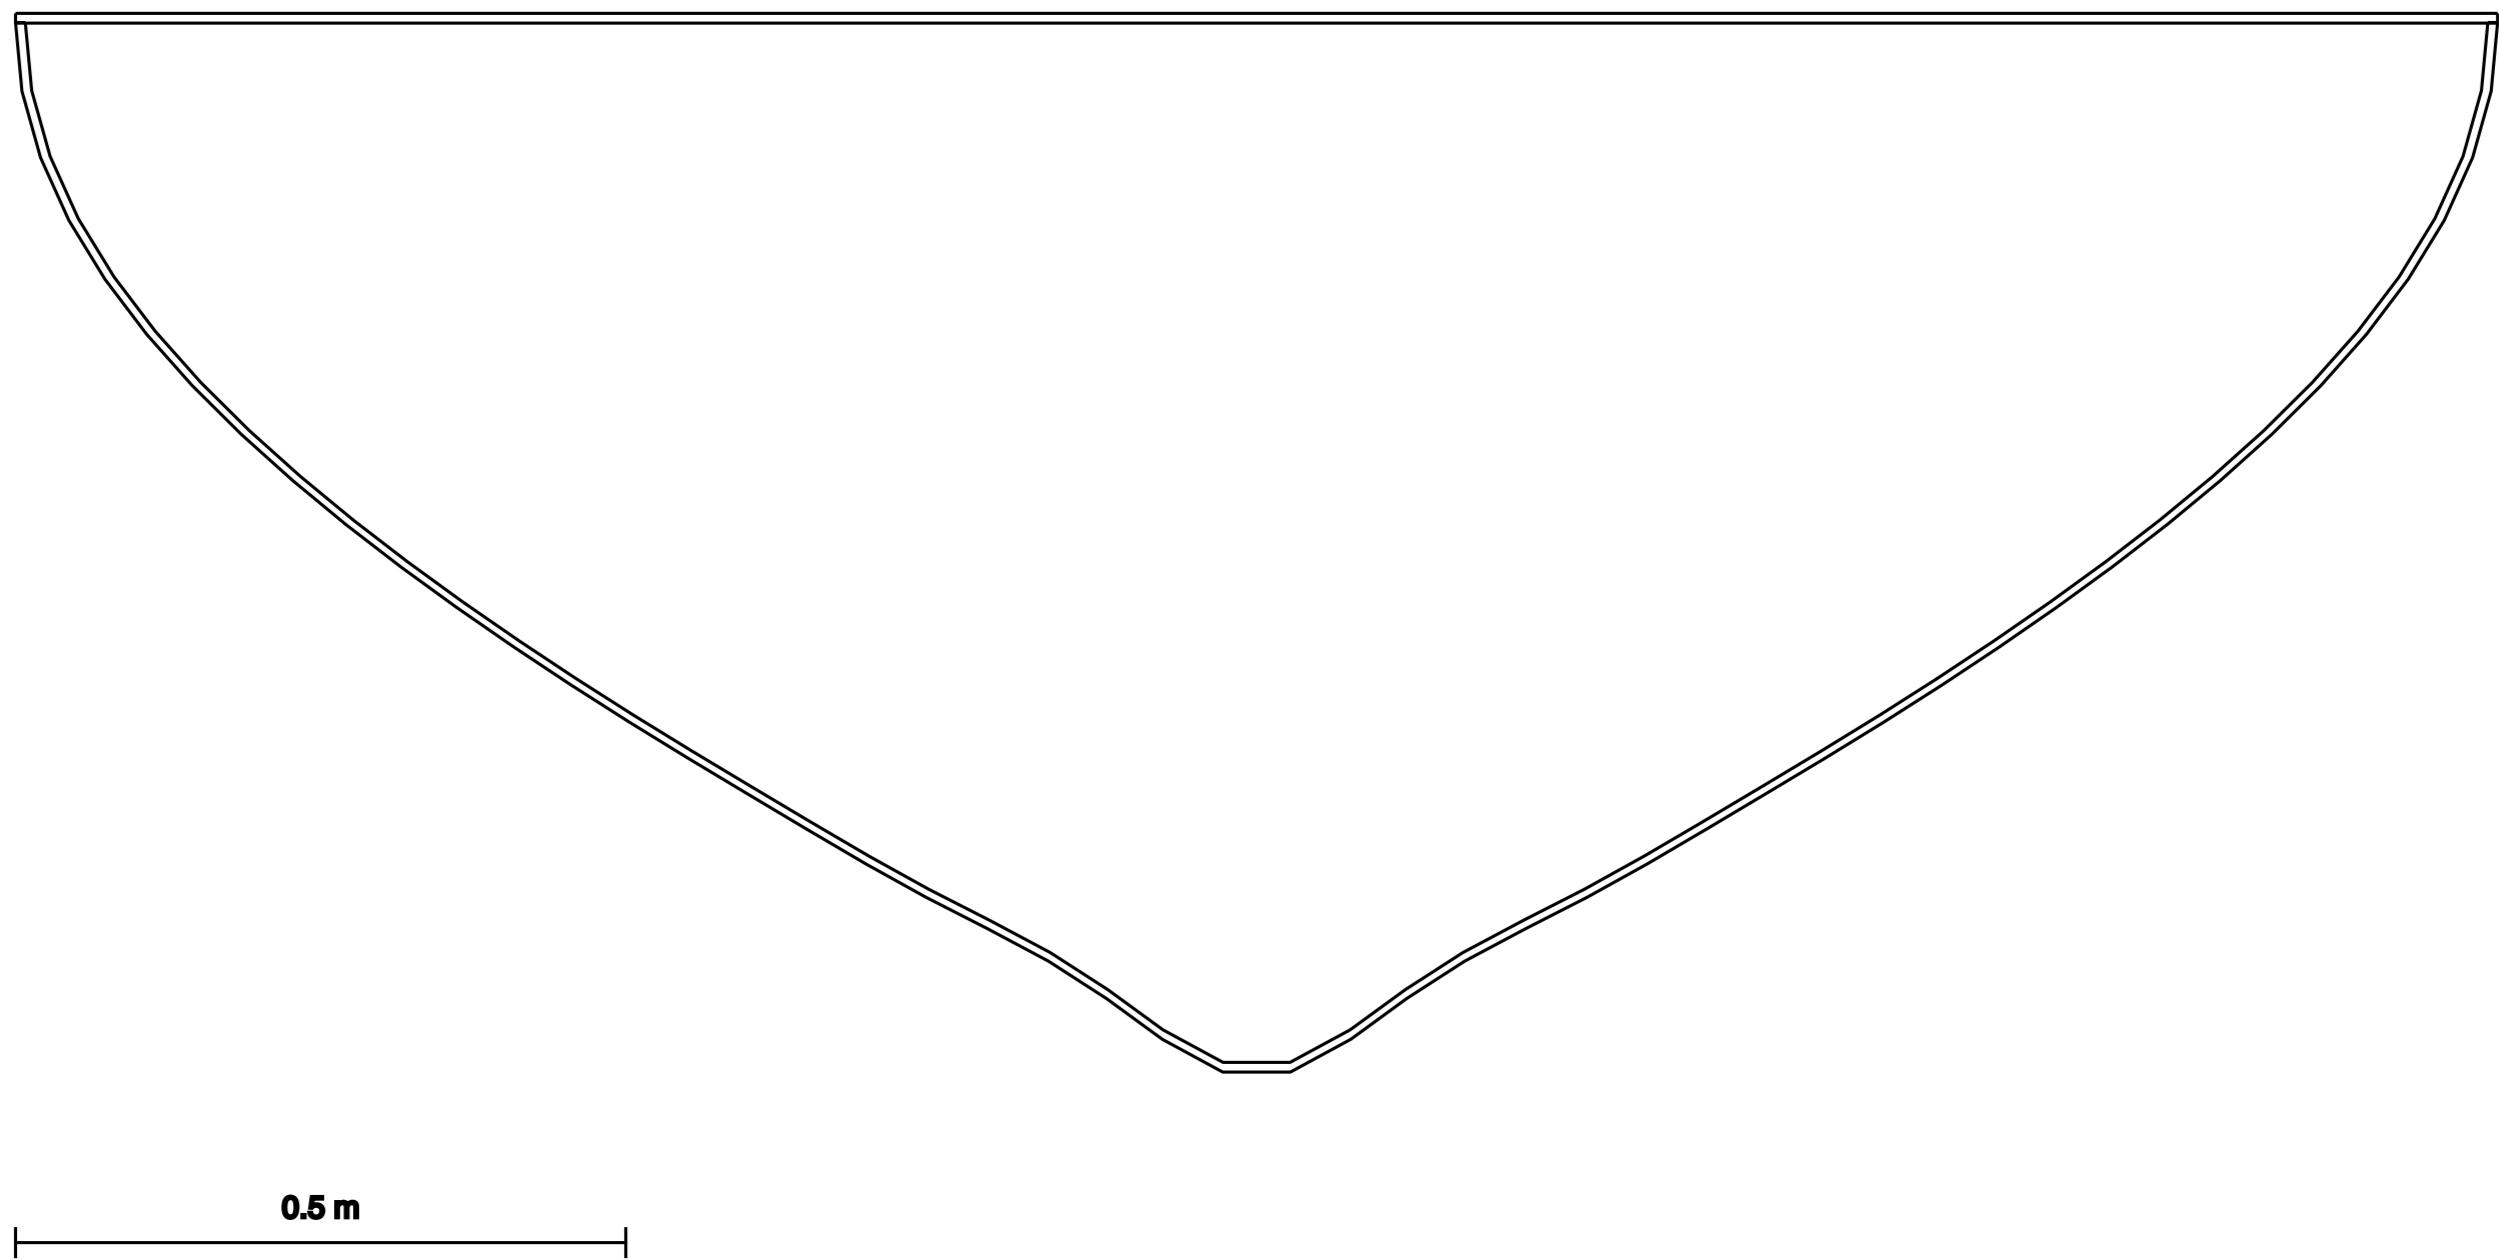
Body Plan—Section at stn_2 (Y=-1017mm)
